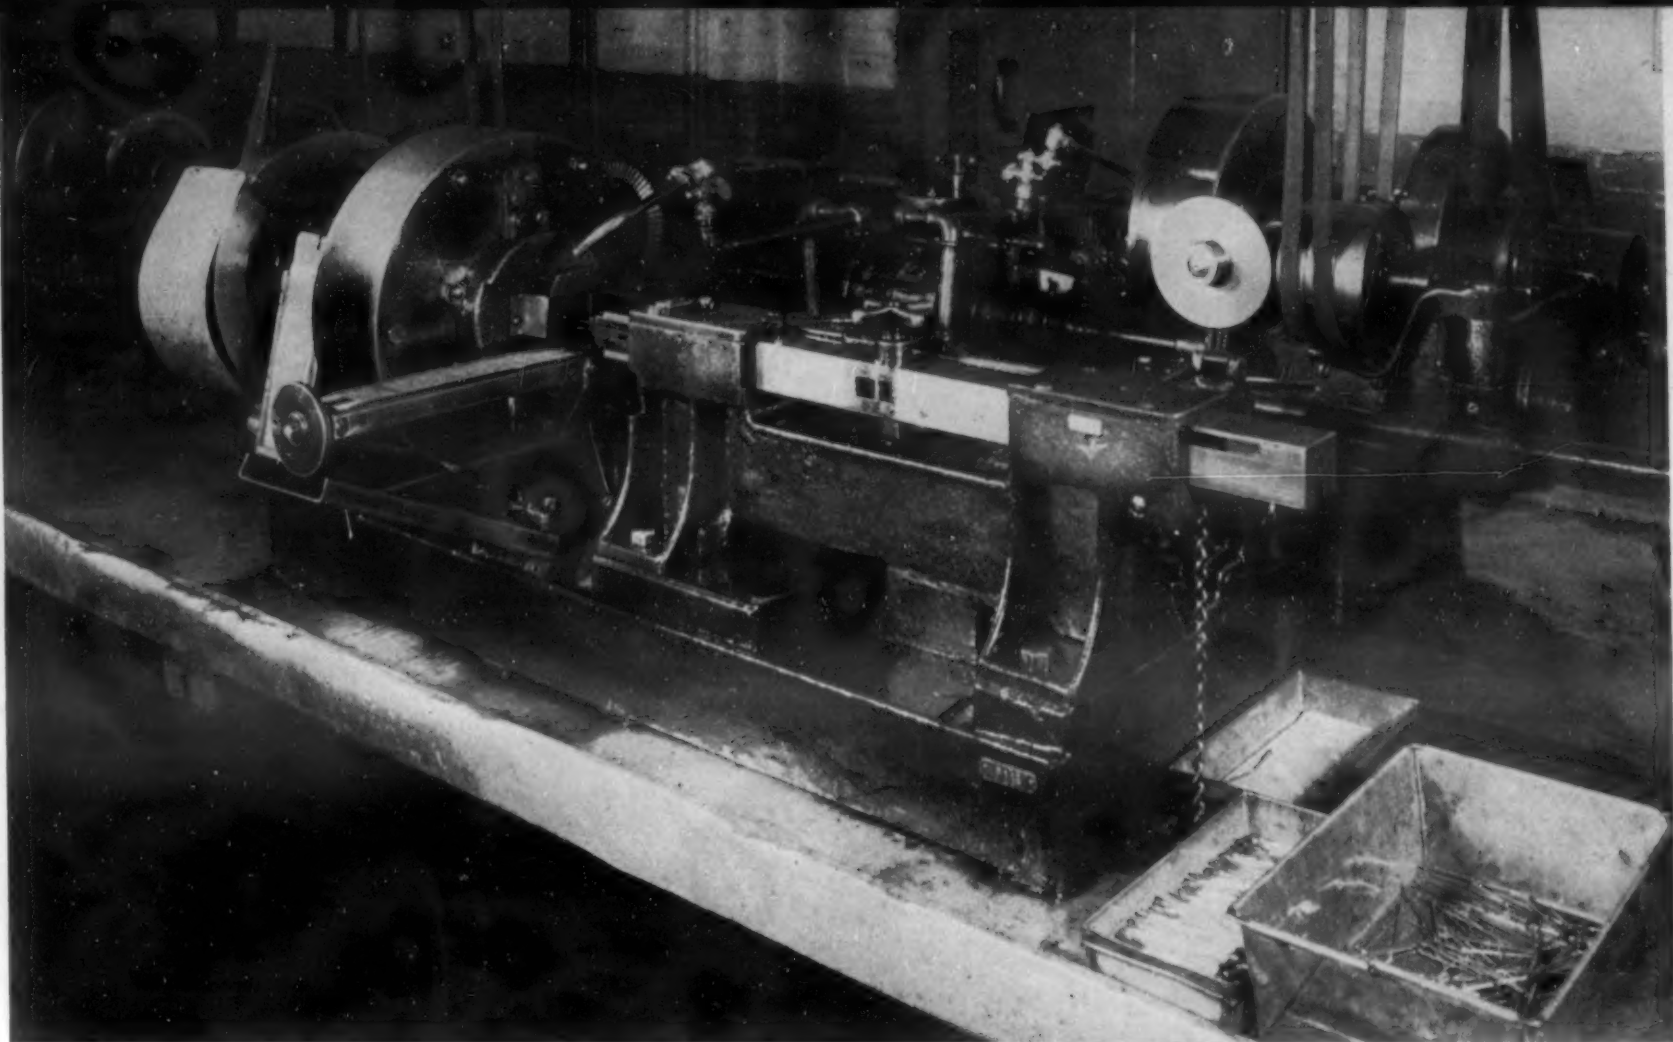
Reducing Machine Used in Making Temple Butts for Spectacles.
